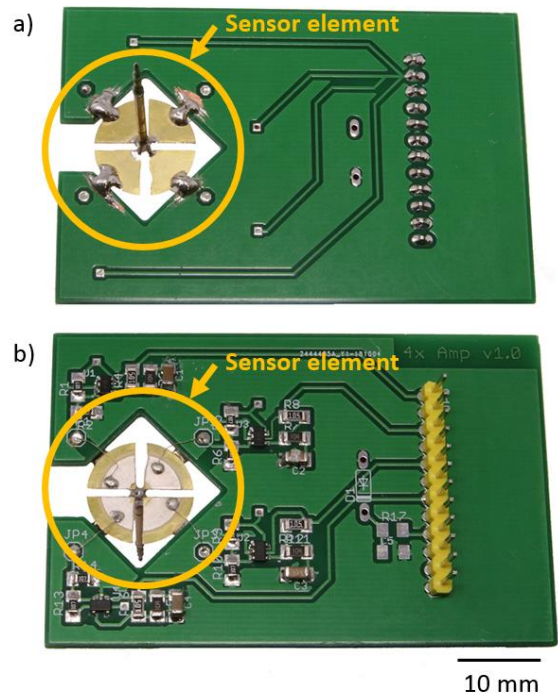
Photographs of the sensor PWB from a) bottom (sensor) side and b) top (electronics) side.
